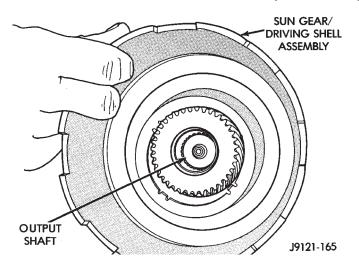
Installing Assembled Sun Gear And Driving Shell On Output Shaft
